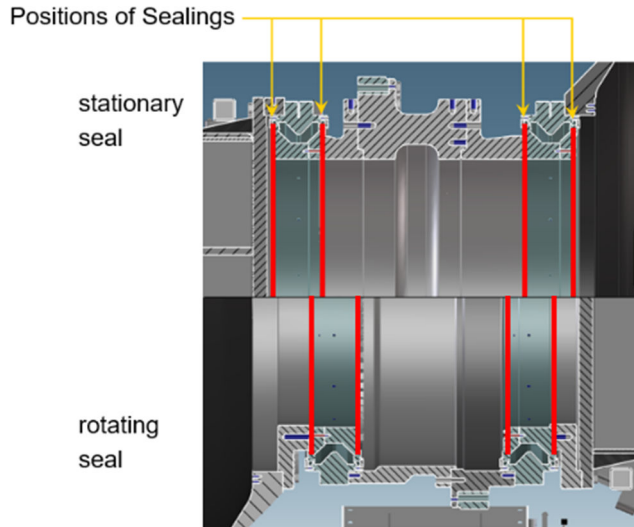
Possible seal installation positions on Main Bearing Test Rig 1
